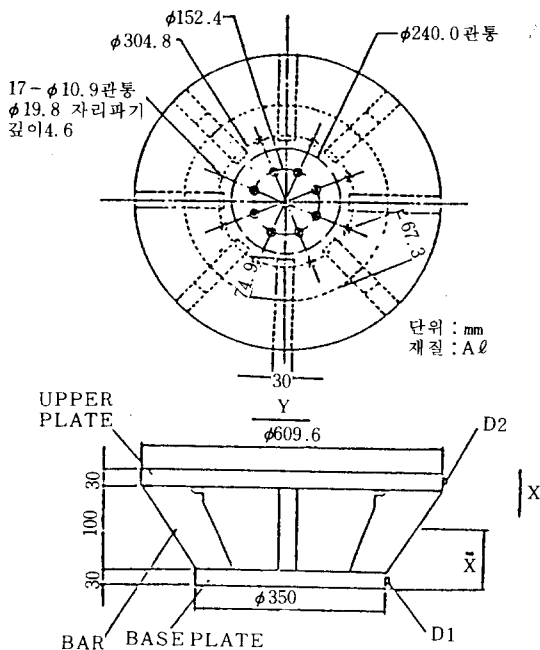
Dimension and Shape of Complex Shaped Fixture III
